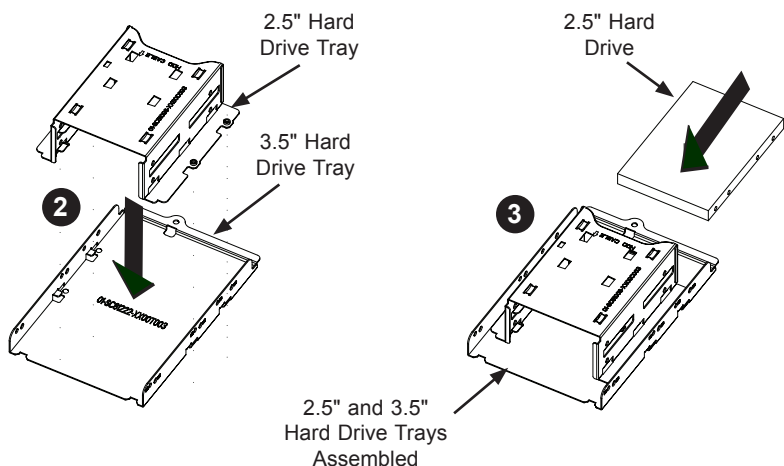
Installing the 2.5" Hard Drives and Tray into the Tray Assembly
